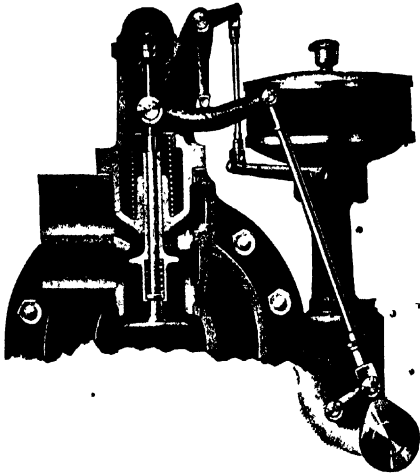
INLET VALVE OF GAS-ENGINE SHOWING "LIFT" AT FULL LOAD. [Crossley.]
